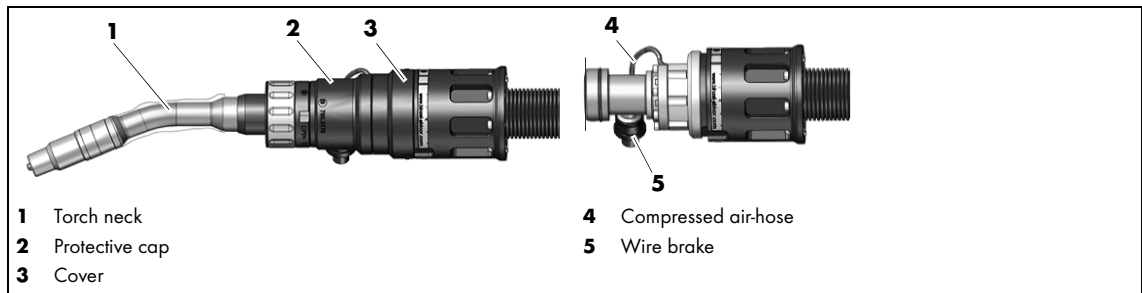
Cleaning the iSTM mini for ABIROB® W with wire brake
